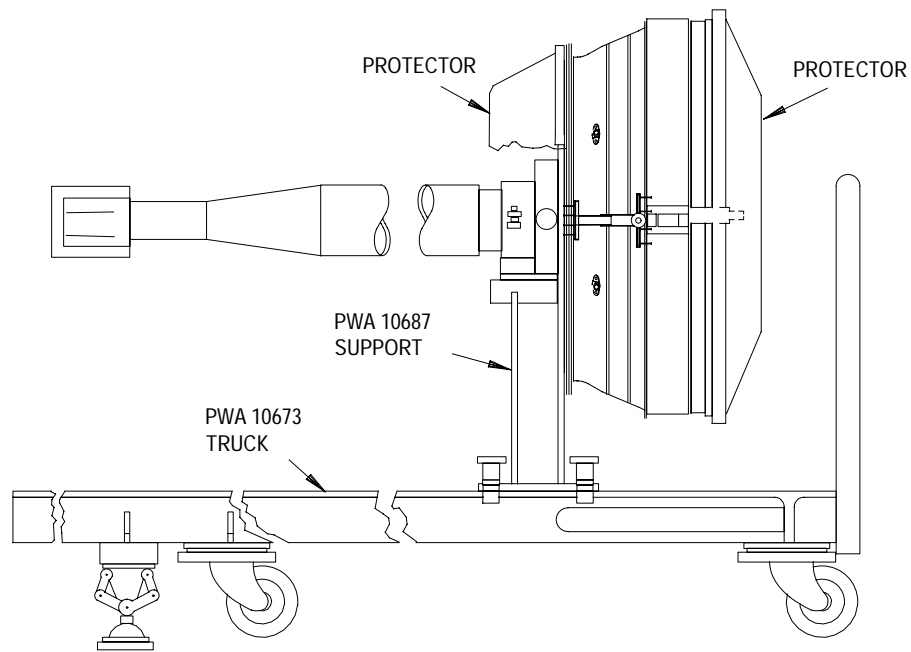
Fan Drive Turbine Module - Removal From Shipping Container (Sheet 3 of 4)
